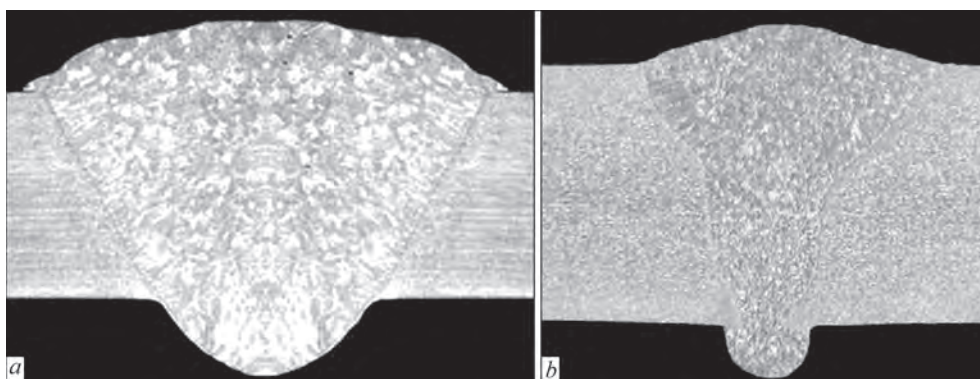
Macrostructure of welds produced by different processes of welding 1561 alloy ($\delta = 6$ mm): *a* — P-MIG ($I \approx 200$ A; $U = 22.5$ V; $V = 0.42$ m/min; $E_{\text{MIG}} \approx 4.8$ kJ/cm); *b* — laser-P-MIG welding ($P = 3.0$ kW; $I = 75$ A; $U = 17$ V; $V = 1.0$ m/min; $E_{\Sigma} = 2.4$ kJ/cm)
